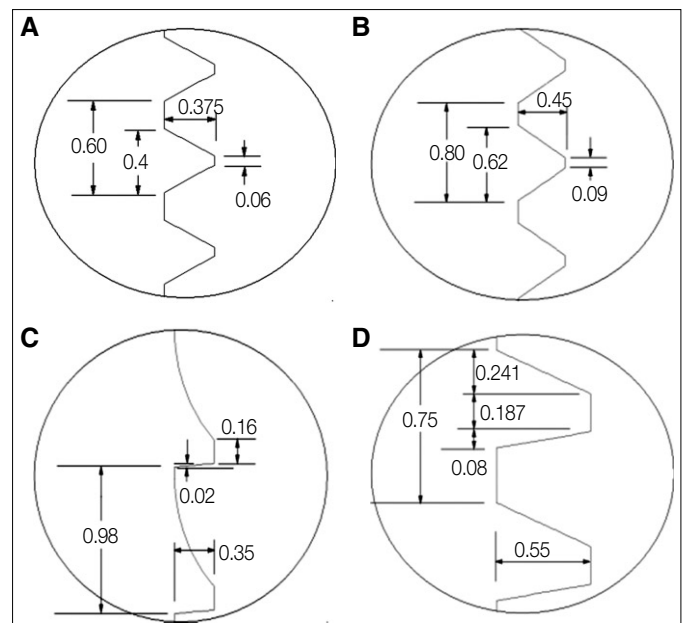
The 4 test implants with different screw designs. (A) small V-shape screw, (B) large V-shape screw, (C) buttress screw, and (D) trapezoid screw (unit: mm).
